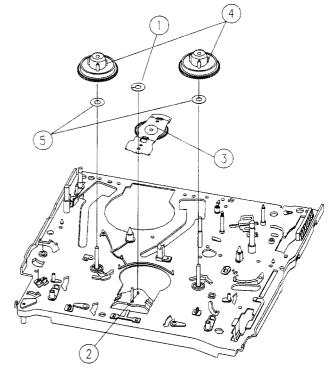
IDLER PLATE TOTAL ASS'Y & S/T REEL TABLES REMOVAL
